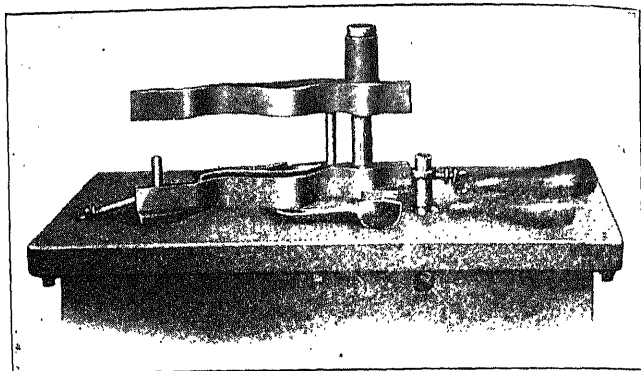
Jig for Holding Teapot Spouts for Welding.
